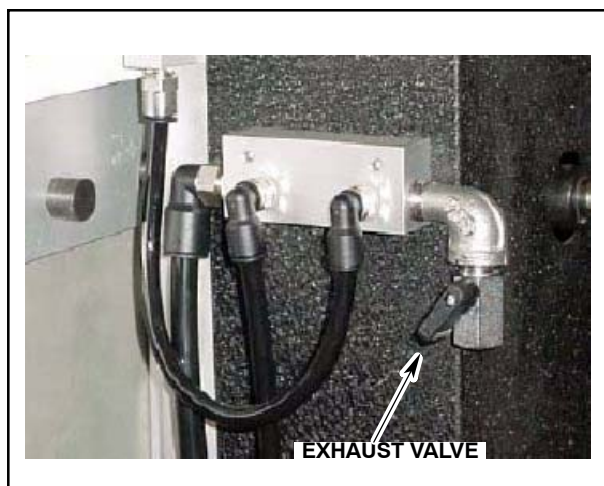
Adjust the Air Blow At the Exhaust Valve
